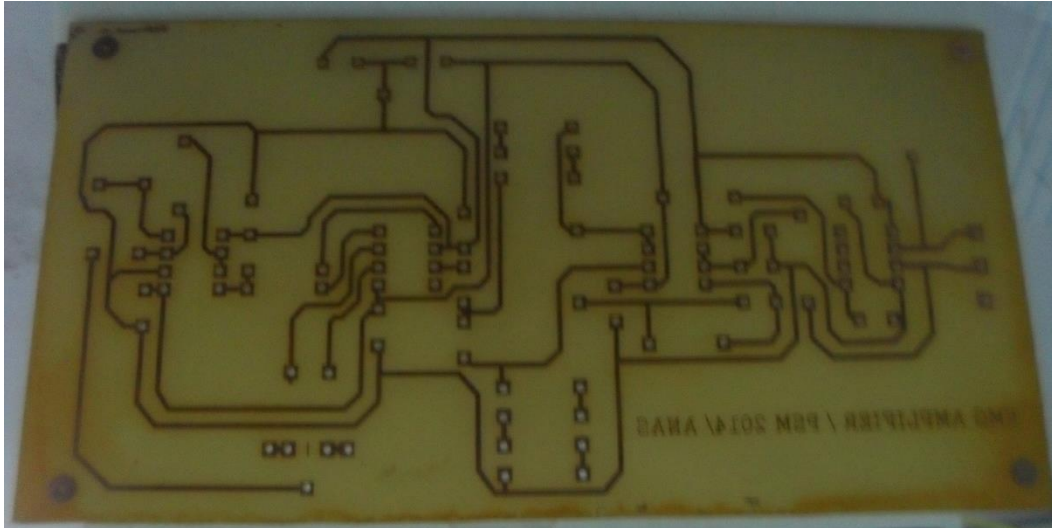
The real Printed Circuit Board (PCB) of EMG amplification circuit for this project
